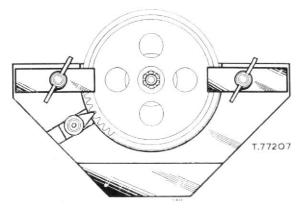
Vice block T.77207 for facilitating removal of split pin and slotted nut from air compressor drive.
